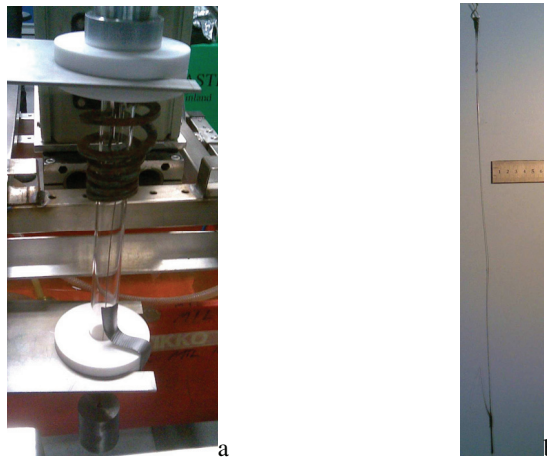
a) The assembled setup for wire drawing in the supercooled liquid region. b) the glassy wire produced using this setup.
